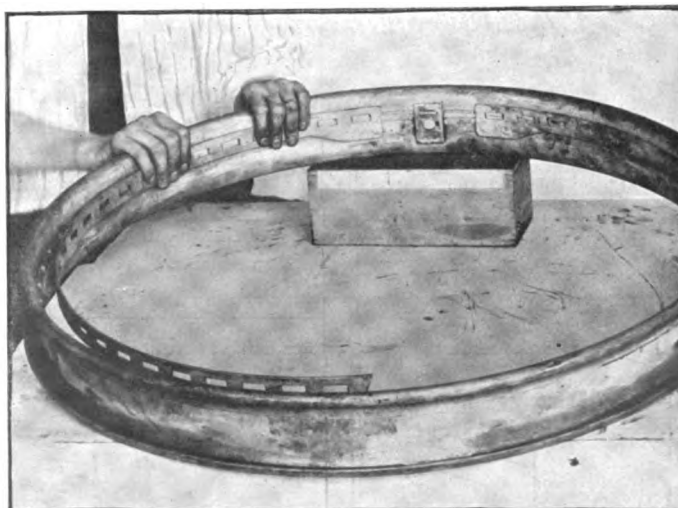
Locking ring sections of Stanweld No. 30. Slots in rings being fitted over lugs
